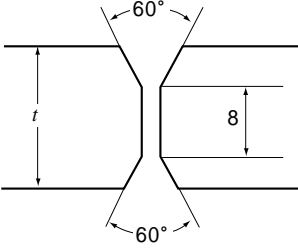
Butt Weld Test Assembly with Two-run Technique (Automatic welding, Unit : mm, t : plate thickness)
